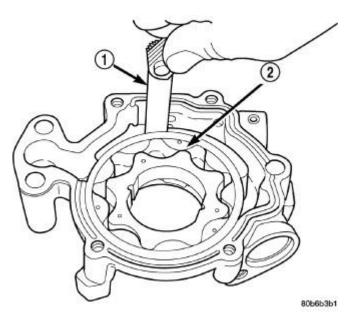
Measuring Outer Rotor Clearance Courtesy of CHRYSLER LLC
